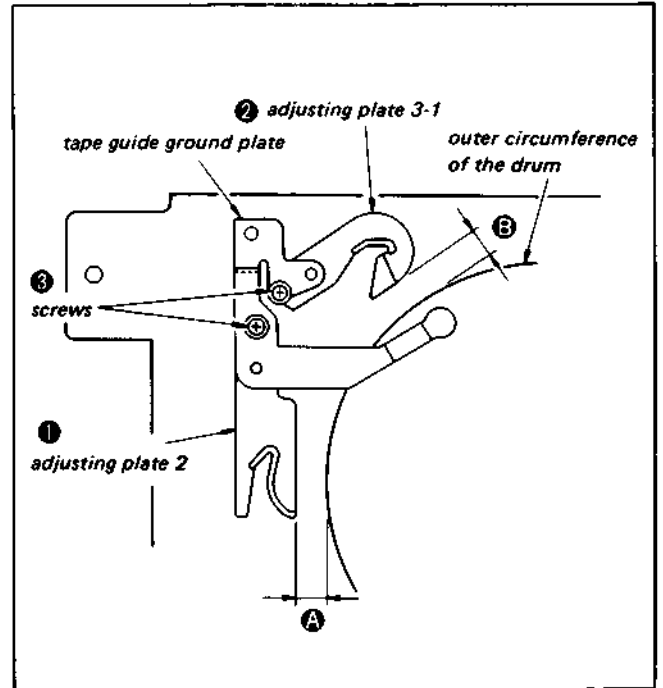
Measurement of the position of adjusting plates 2 and 3-1
